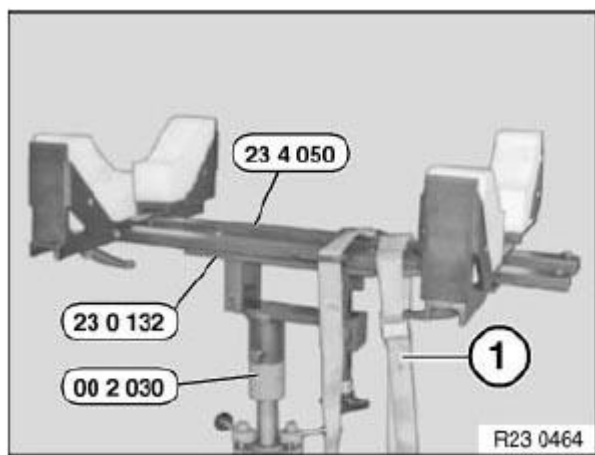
Identifying Special Tools (00 2 030) And (23 4 050)
